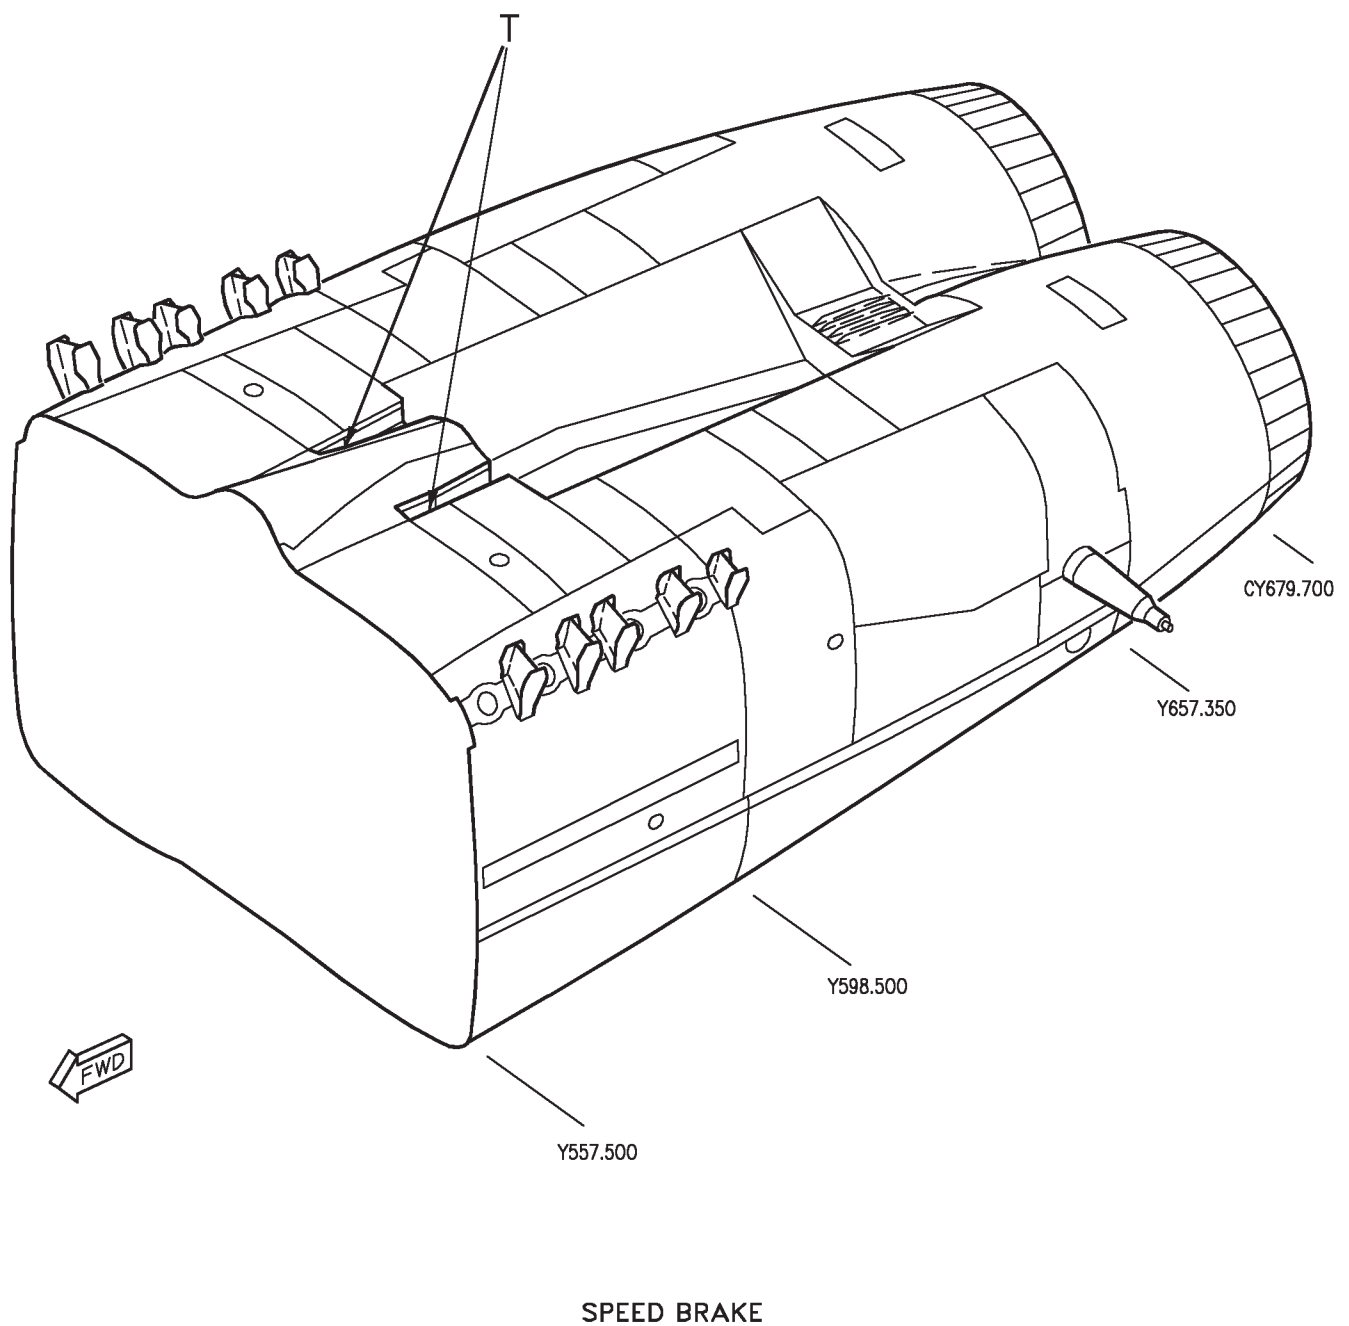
Bushing Removal, Installation, and Reaming (Sheet 29)
